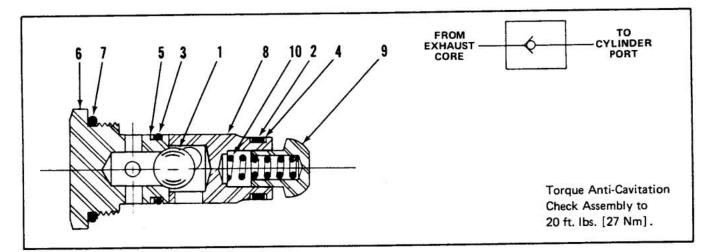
Optional Anti-Cavitation Check Assembly.
